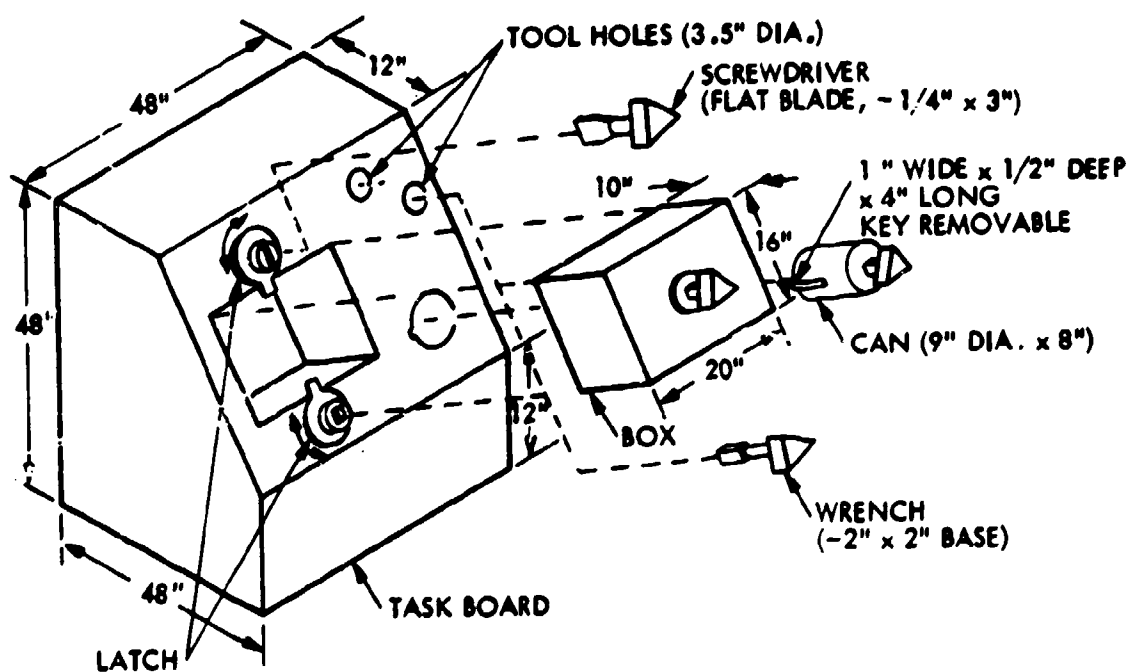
Tool and Module Handling Task Board, Located in the Bay of the Shuttle Mock-Up
